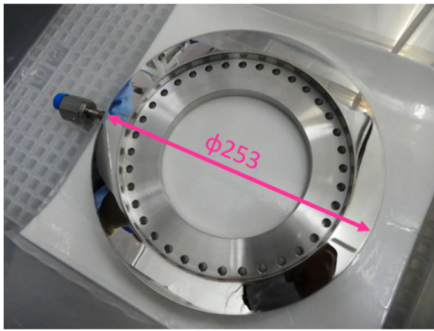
Photograph of the pillow seal with the diaphragm made from the welded plate.
